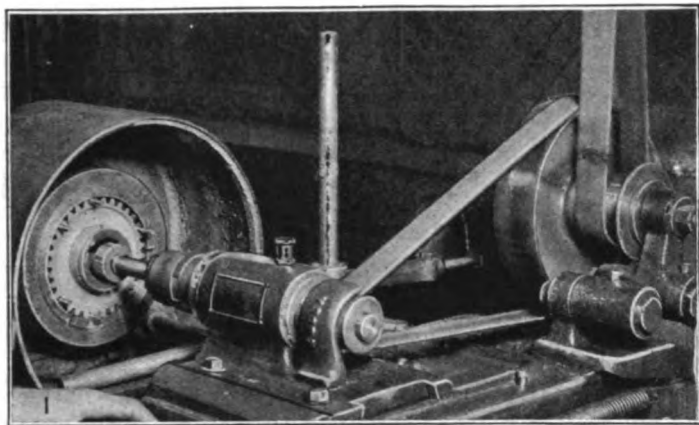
GRINDING BORE OF GEAR. FIG. 2—GRINDING ROLLERS FOR VALVE ROD. FIG. 3—GRINDING VALVE RODS. FIG. 4—SQUARING THE ENDS OF PUSH RODS. FIG. 5—GRINDING THE STEERING KNUCKLE. FIG. 6—FACING SPRING SHACKLE. FIG. 7—GRINDING END OF SHACKLE. FIG. 8—GRINDING REAR AXLE HOUSING. FIG. 9—FINISHING CONNECTING ROD FACE. FIG. 10—GRINDING VALVE ROCKER.
